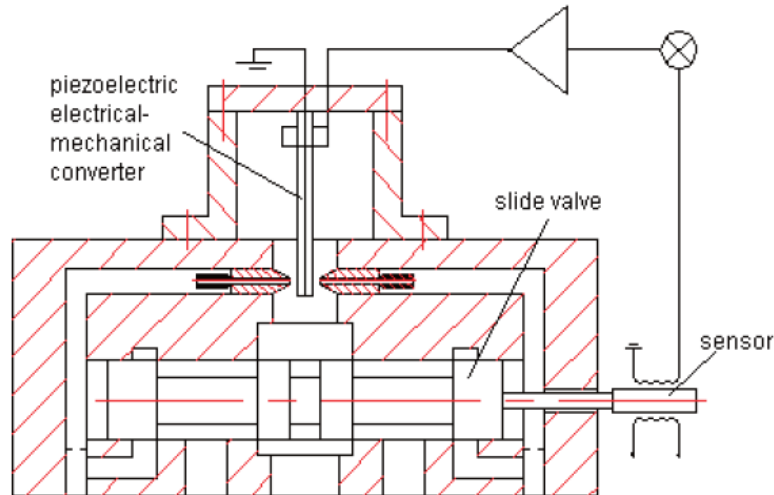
Cross section illustration of rectangular piezoelectric bender controlling a nozzle flapper valve [34].
